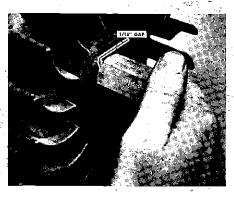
Thread the flywheel knock off tool onto the crankshaft and screw it almost all the way in, except for a 1/16" gap at the end.
